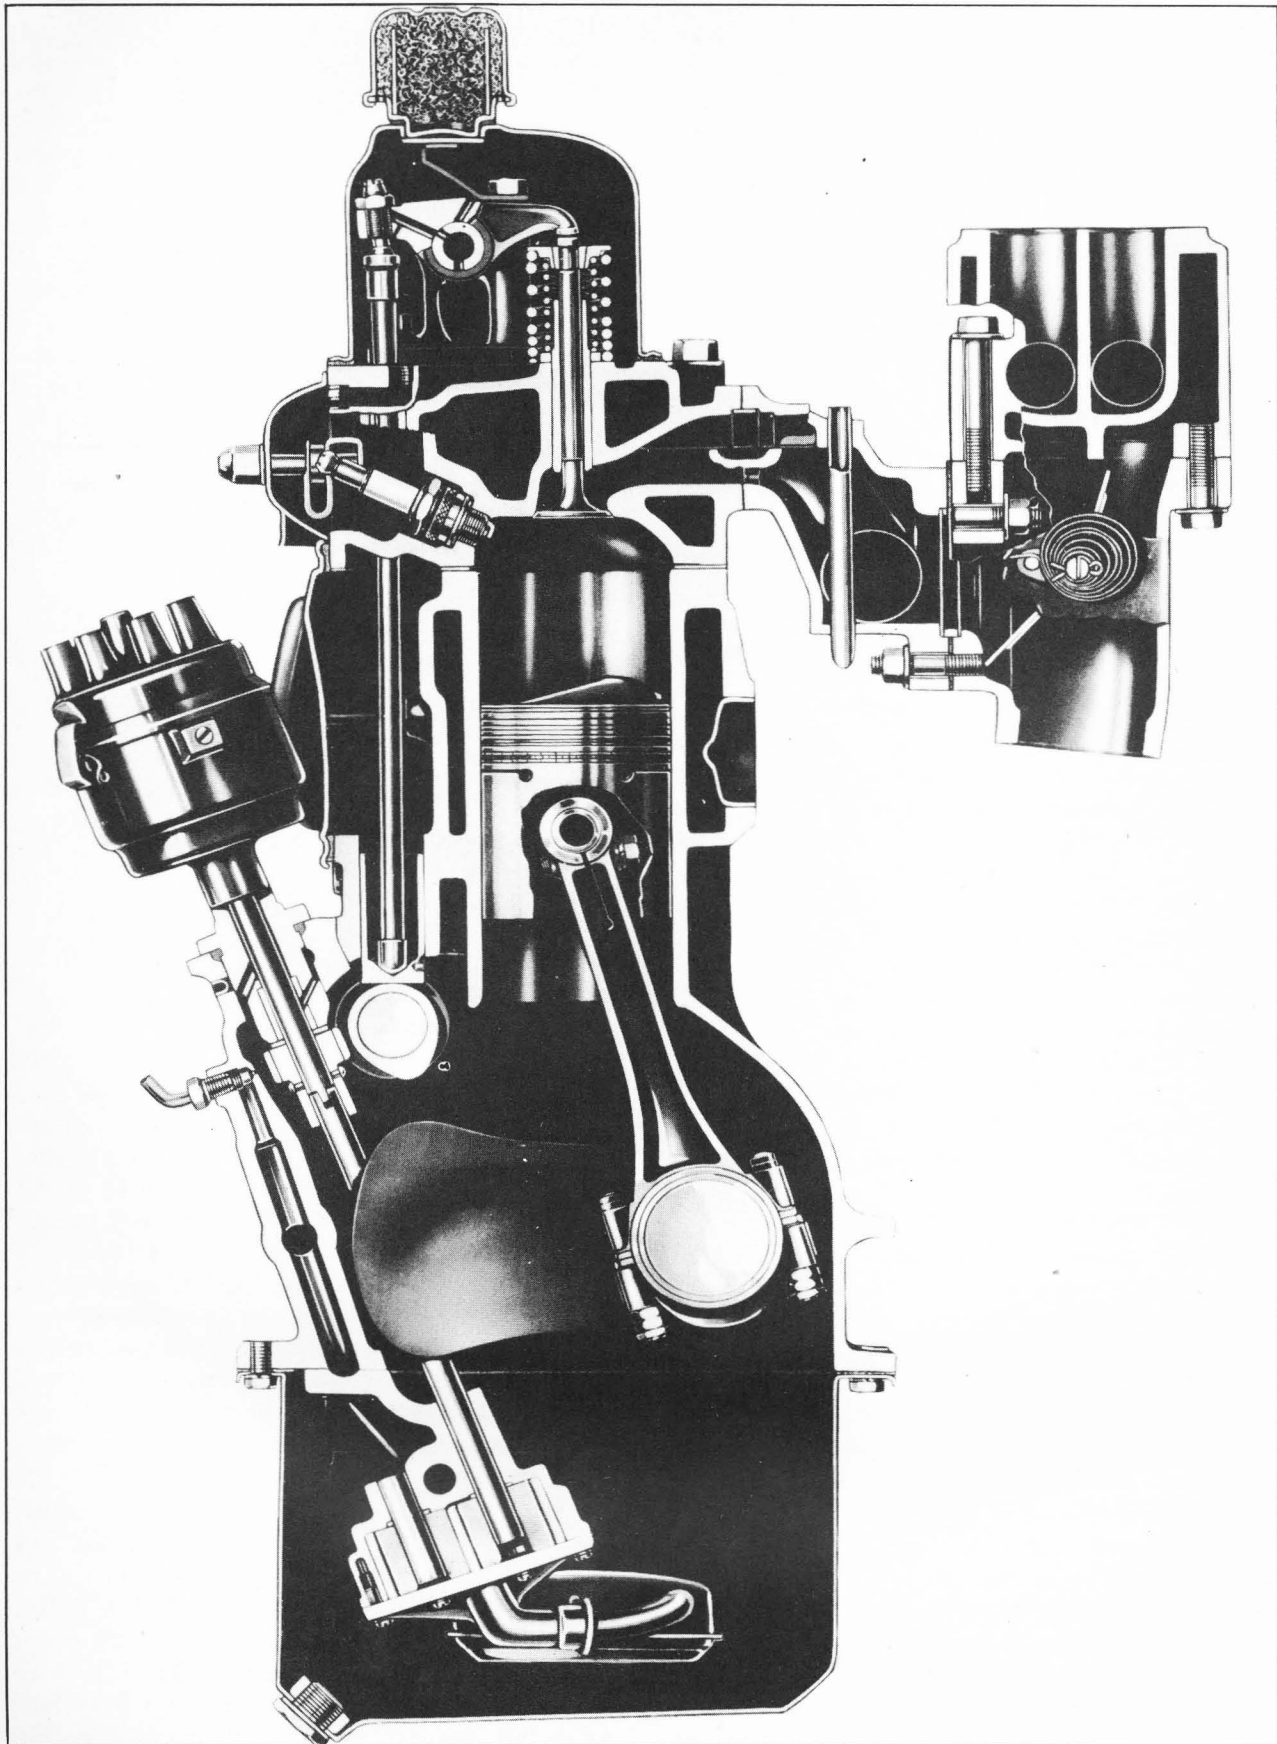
Engine, with Adjustable Valve Lash—End Sectional View
